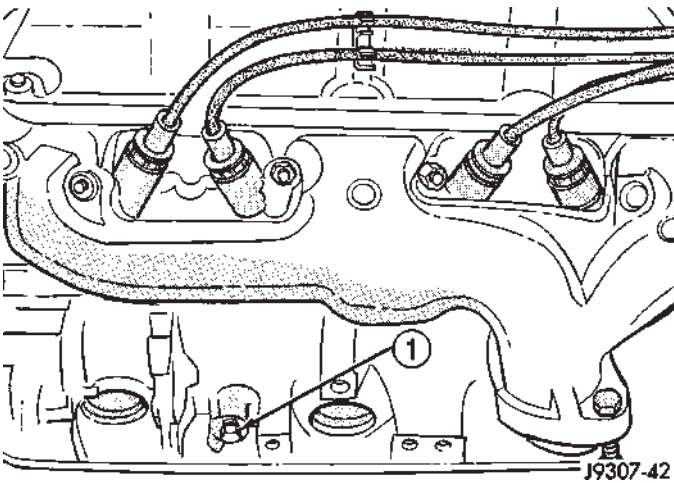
Cylinder Block Drain Plug—3.9L/5.2L/5.9L
